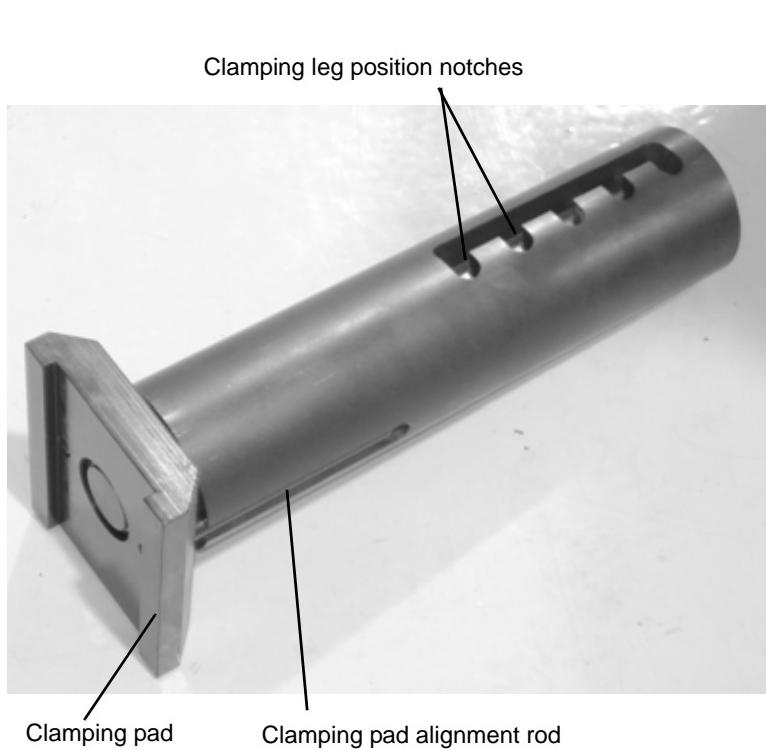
The photo illustrates the parts of the clamping leg. There are eight legs used on the HDSF 4860 machine.
